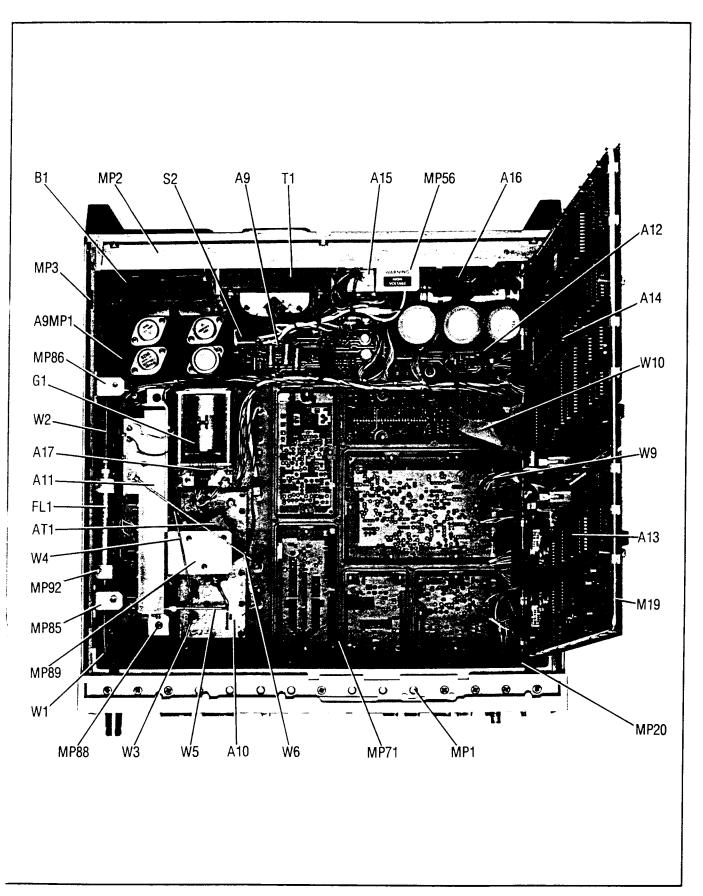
Bottom Chassis Parts, Mechanical Parts, and Cable Identification
